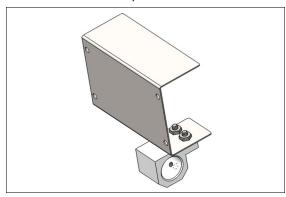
Coolant hose mount bracket installed on the button box cover.
